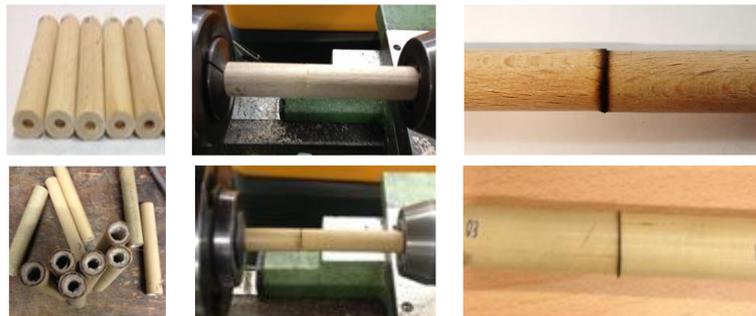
Friction welding on bars of wood (top) bamboo (bottom).
